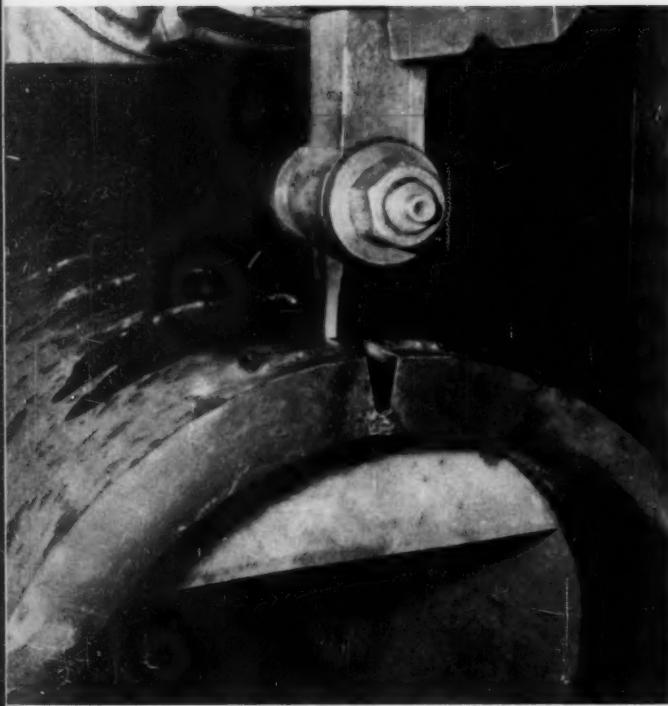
Machining the Outer 20° V Groove of the Longitudinal Seam of the Shell. Inner V has been filled with Type 347 and 307 + 1% Mo weld layers
